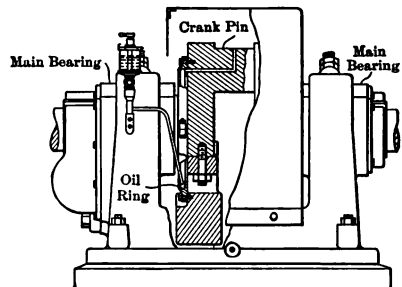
Oil Ring Method of Lubricating Crank Pin.
